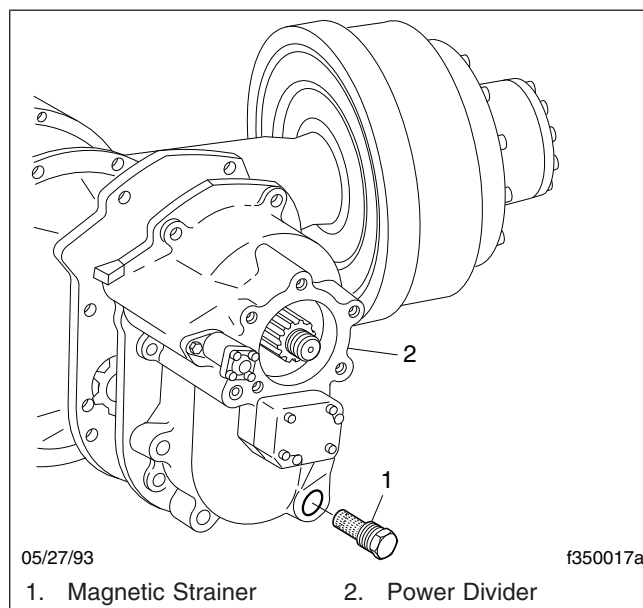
, Dana Spicer Tandem Drive Axle Magnetic Strainer
